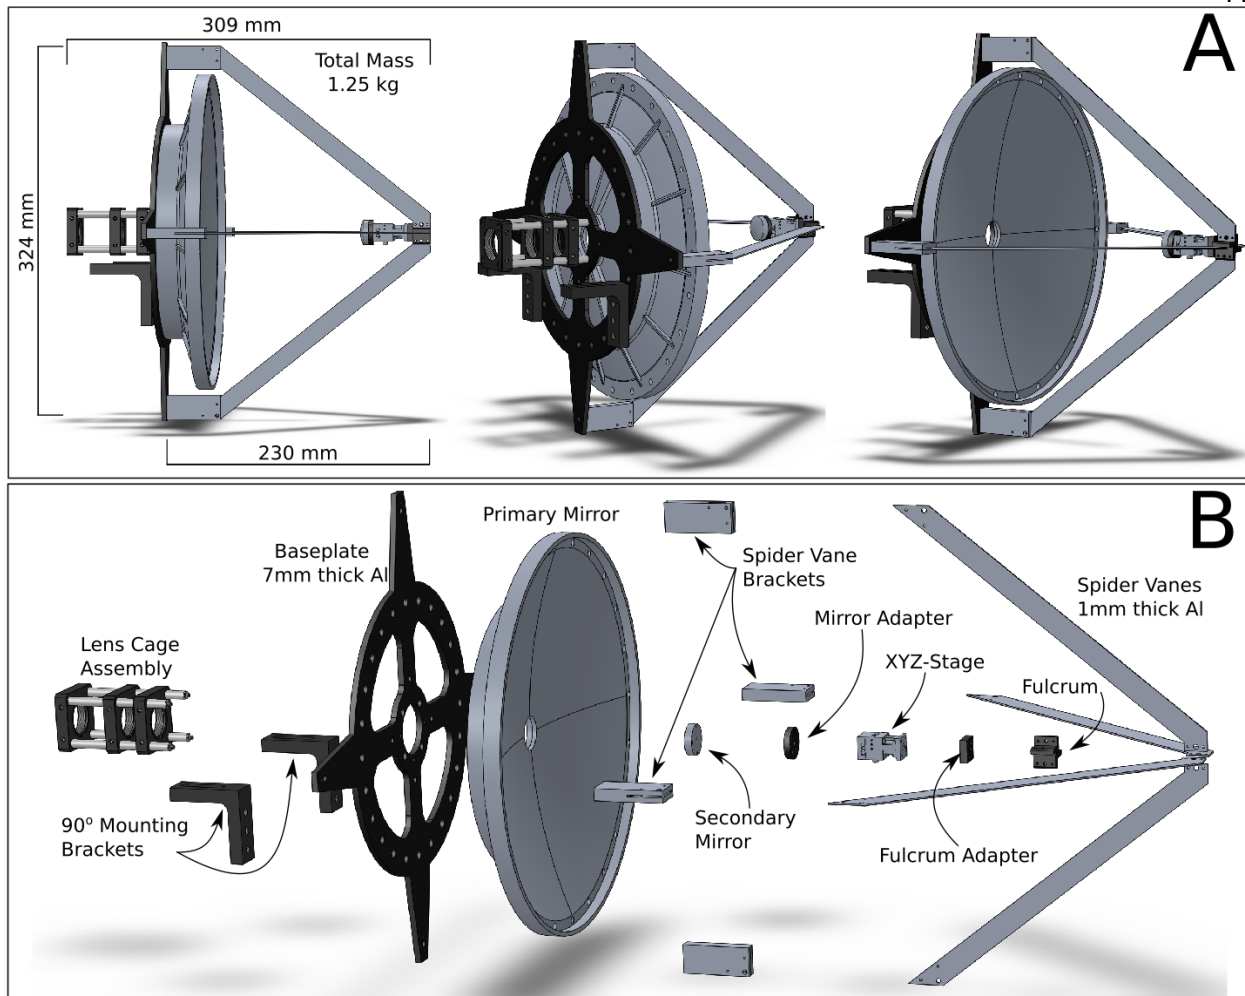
A. The optical assembly of the remote microscope shown in three different orientations. The total mass of the entire assembly is 1.25 kg. B. An exploded view of the opto-mechanical assembly. The lens cage assembly was constructed of off-the-shelf components from Thorlabs, the 90° brackets and miniature XYZ-stage are also commercial products. I designed and fabricated all other components for this thesis.
